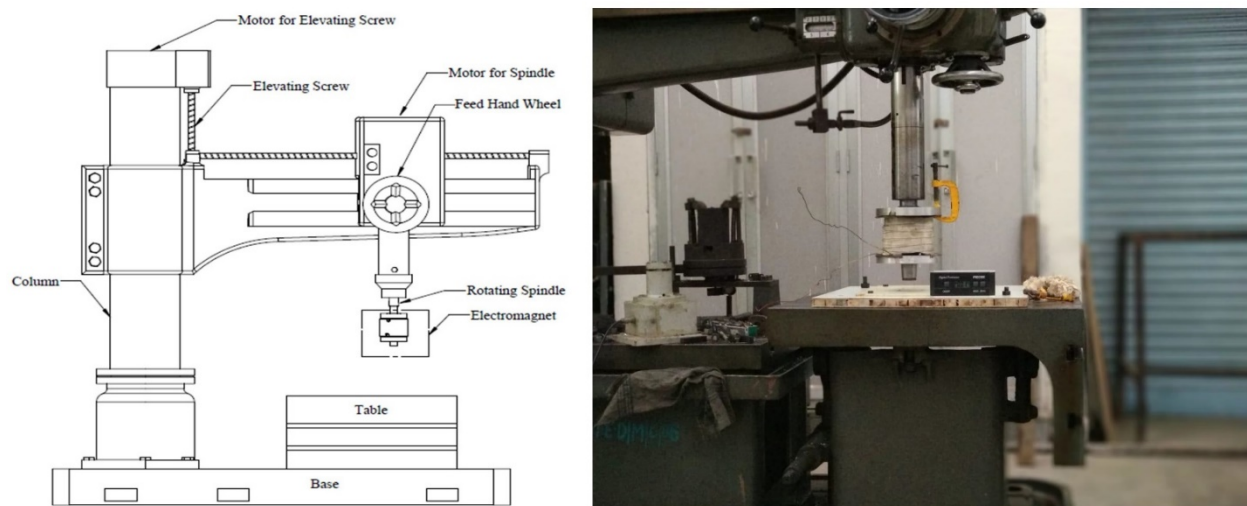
Shown Radial Drill machine as structure for MAF set-up (a) schematic (b) physical
